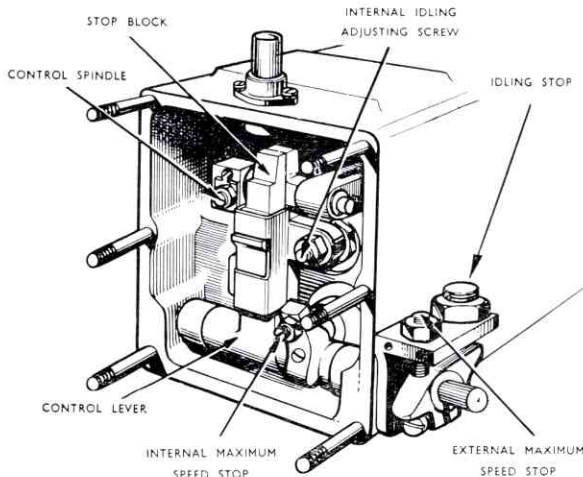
DETAILS OF THE GOVERNOR STOPS
